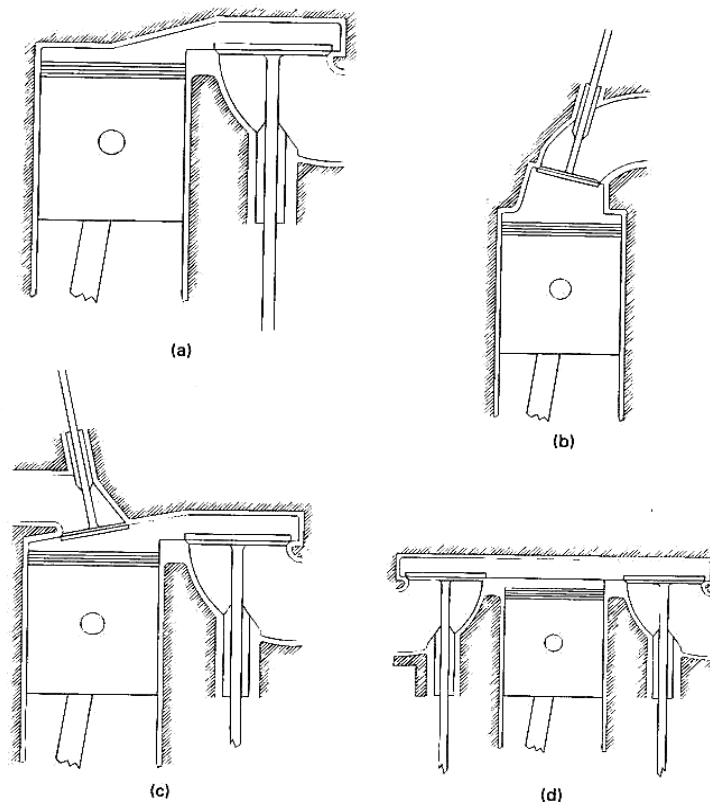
Engine Classification by Valve Location. (a) Valve in block, L head. Older automobiles and some small engines. (b) Valve in head, I head. Standard on modern automobiles. (c) One valve in head and one valve in block, F head. Older, less common automobiles. (d) Valves in block on opposite sides of cylinder, T head. Some historic automobile engines.
